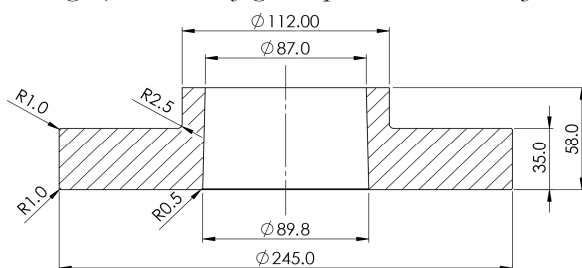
Geometry of the original thrust collar prior to the optimization. Diametral section with dimension expressed in mm
